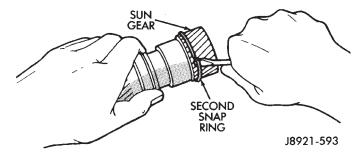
Removing/Installing Second Snap Ring ASSEMBLY
